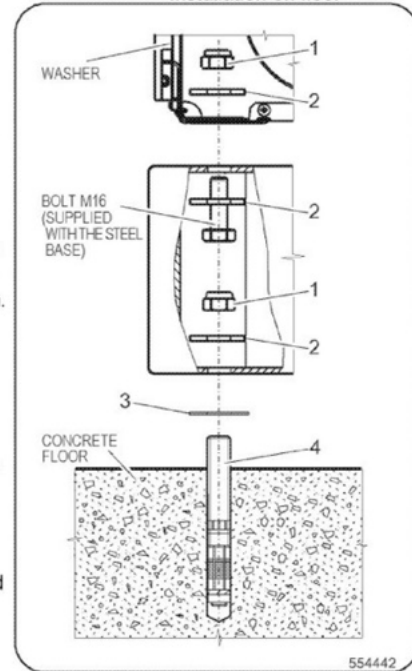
Rigid-mount machines, Installation on a steel base and floor
